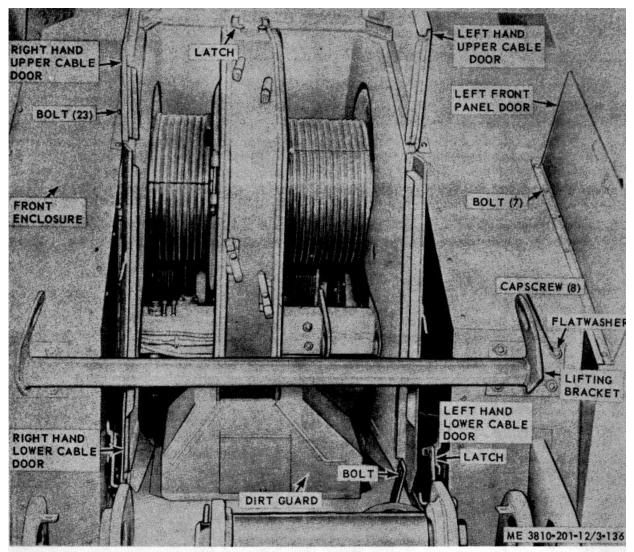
Upper and lower doors (winterized models) removal and installations.
